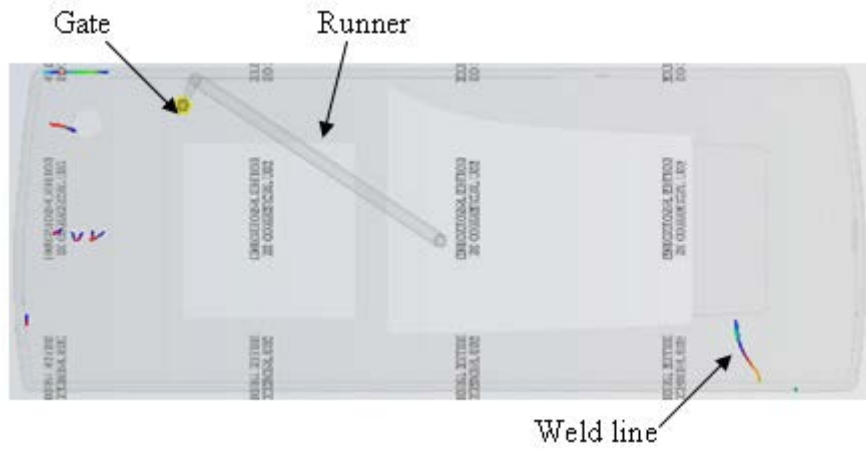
Weld lines produced by runner diameter of 2.542mm
